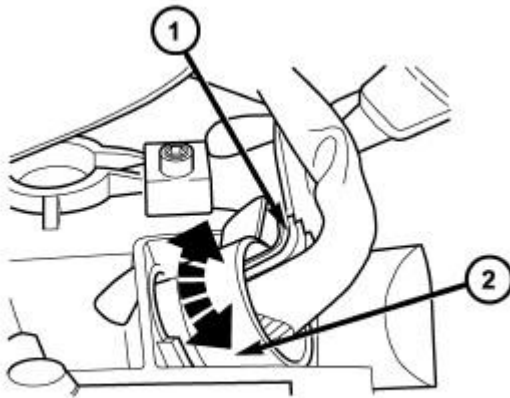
Identifying Gearshift Cable, Eyelet & Manual Shift Lever
